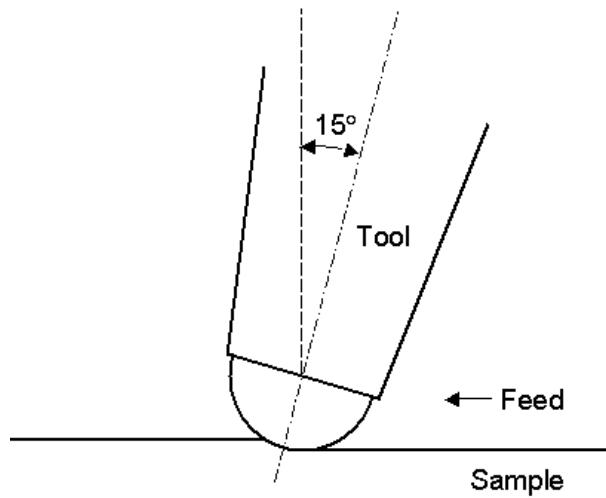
Contact angle between a burnishing tool and a workpiece sample.
